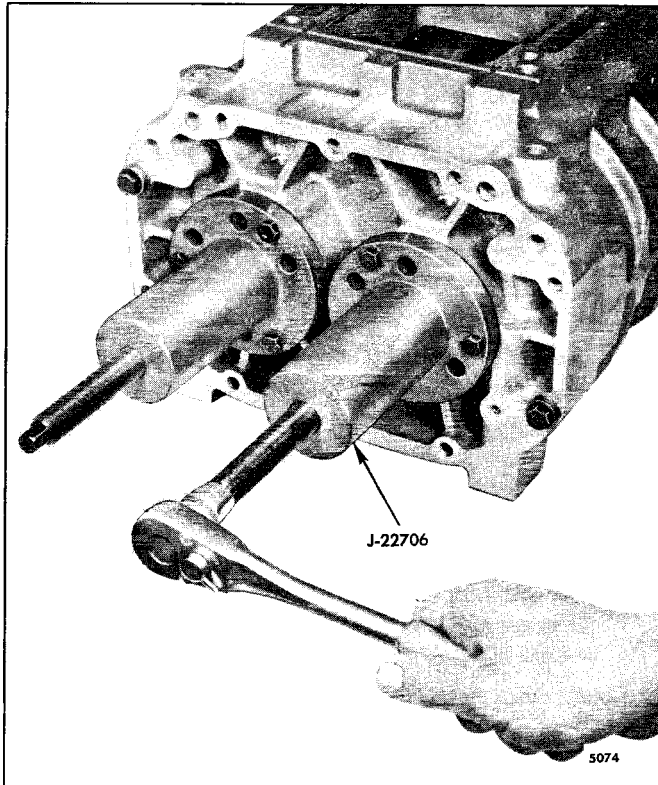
Removing Blower Rotors from Housing and Rear End Plate using Tool J 22706-16
